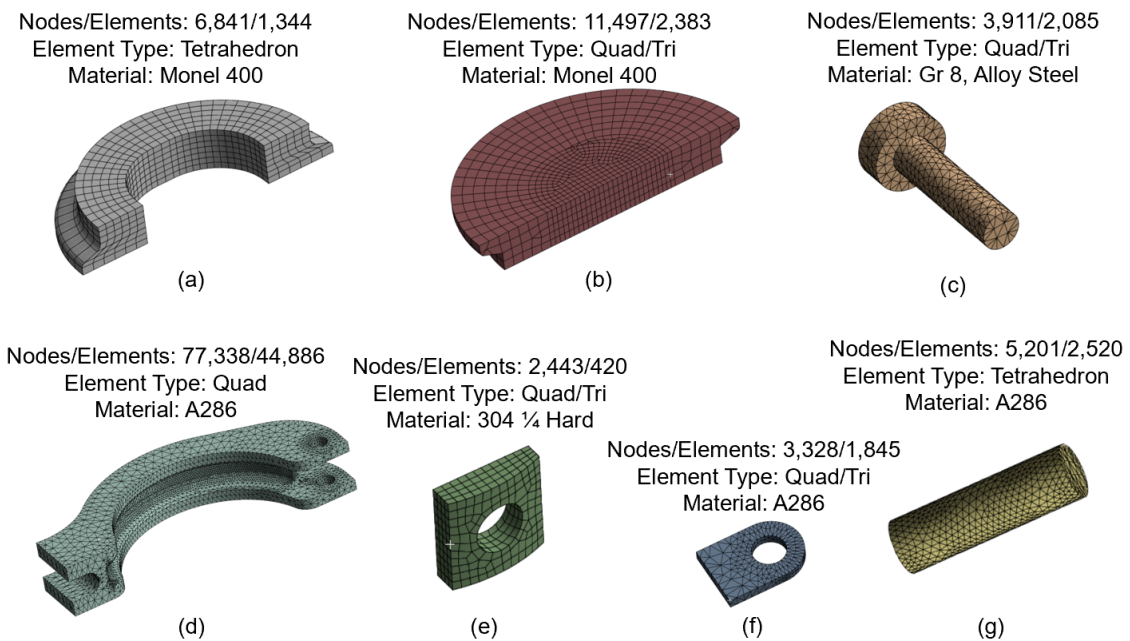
3D clamp assembly model mesh details of the (a) pressure vessel body (b) the pressure vessel cap, (c) bolt & nut (d) v-band clamp half (e) spacer, (f) link and (g) pin
